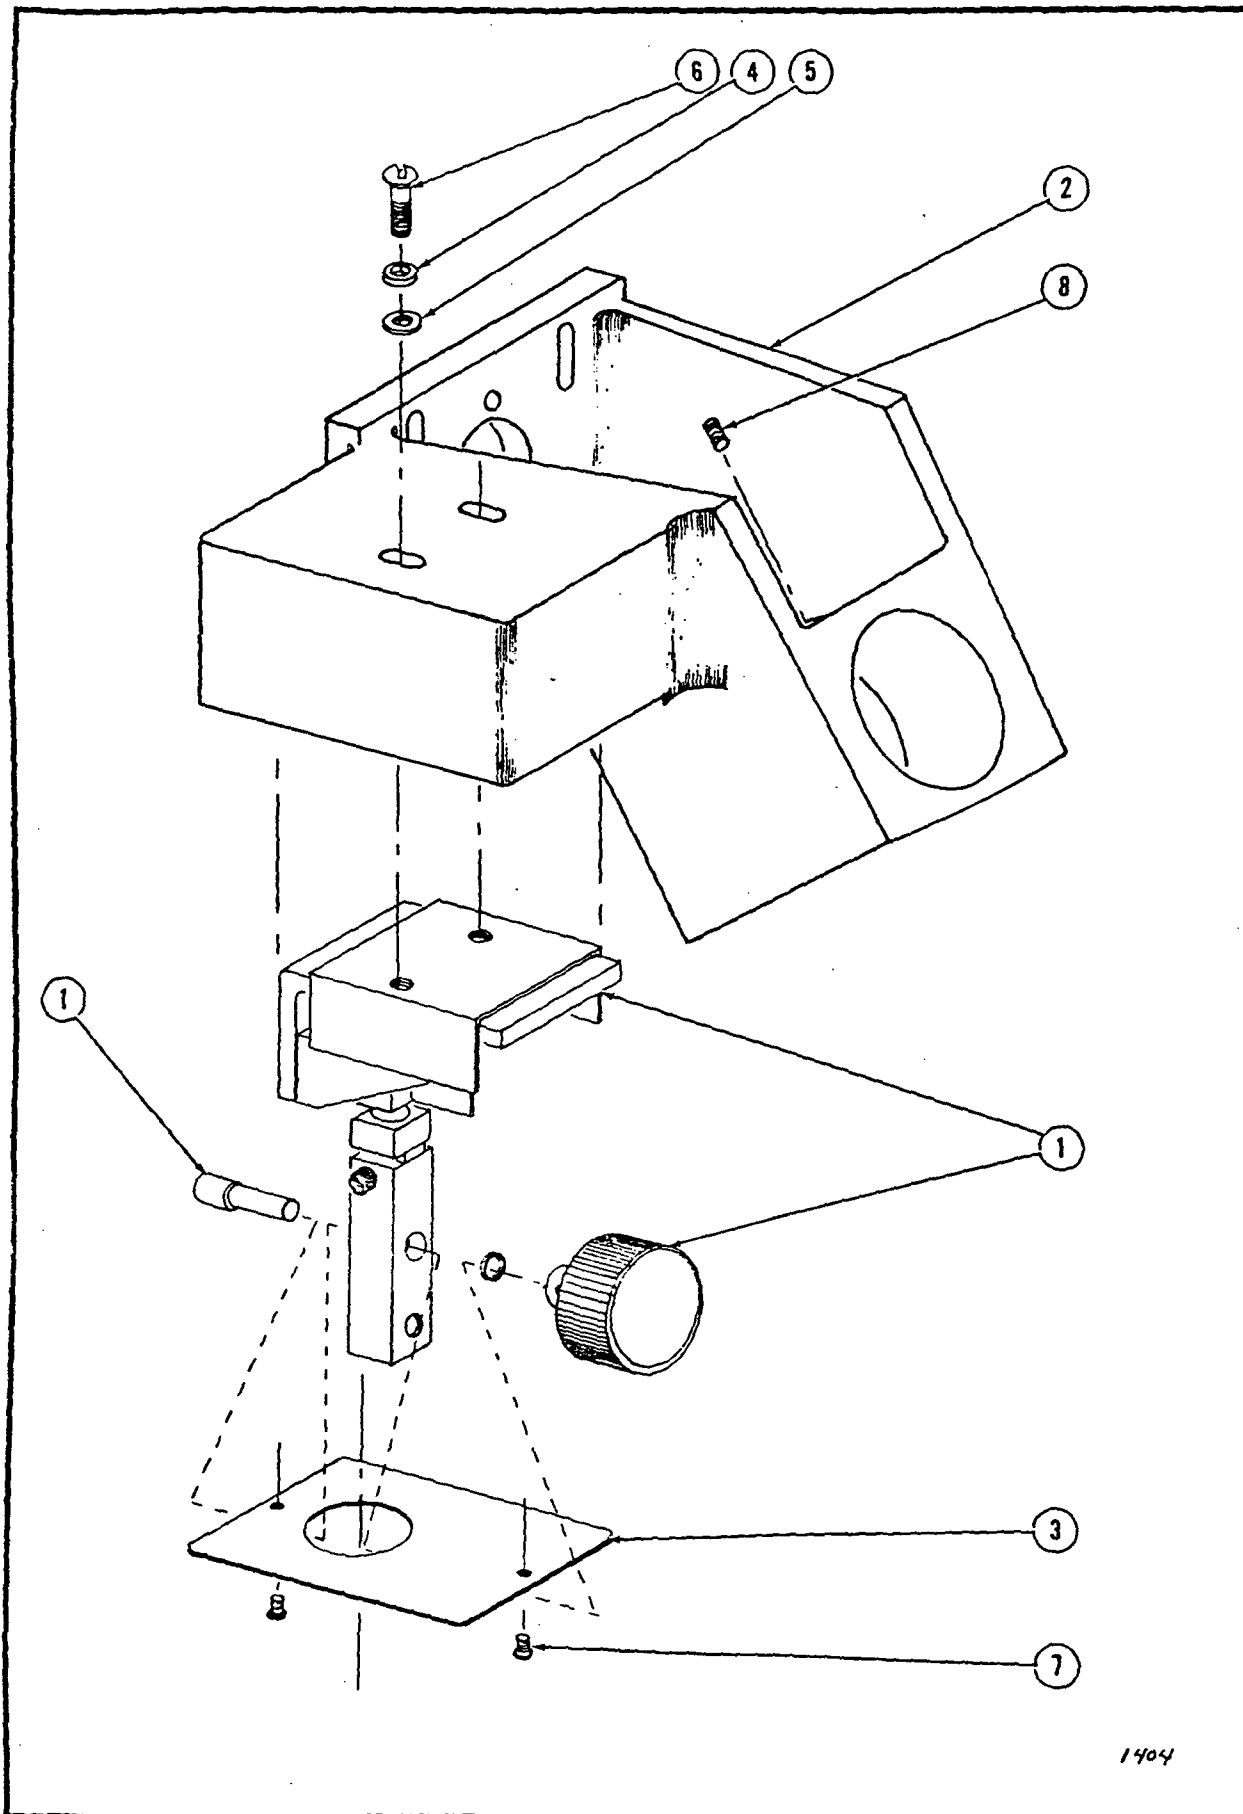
LOCALIZER MOUNTING BRACKET - Part No. 182250
